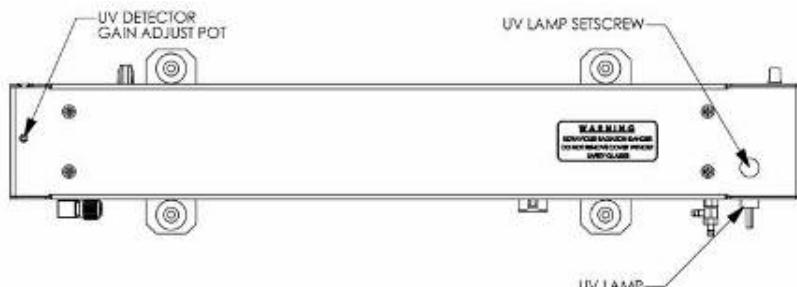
Photometer Assembly – Lamp Adjustment / Installation
